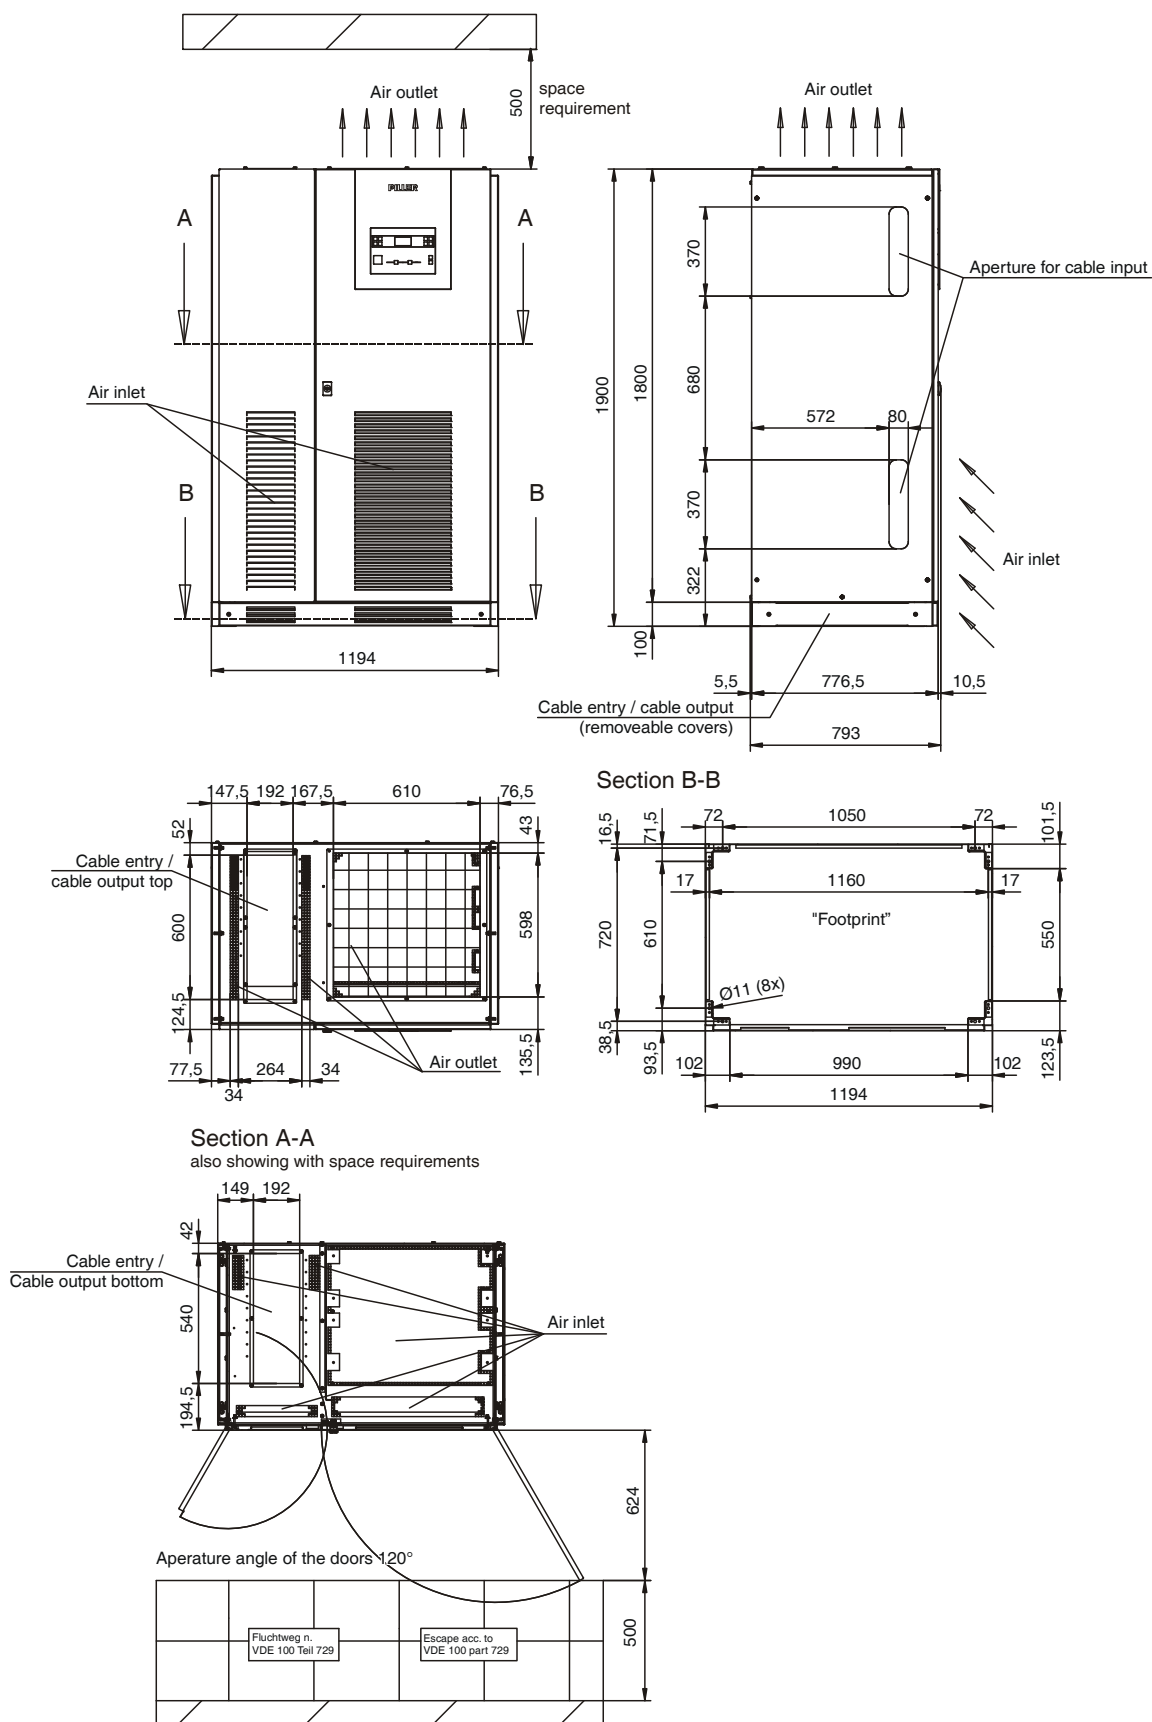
APOCONV 160-200 kVA dimensions and space requirements
